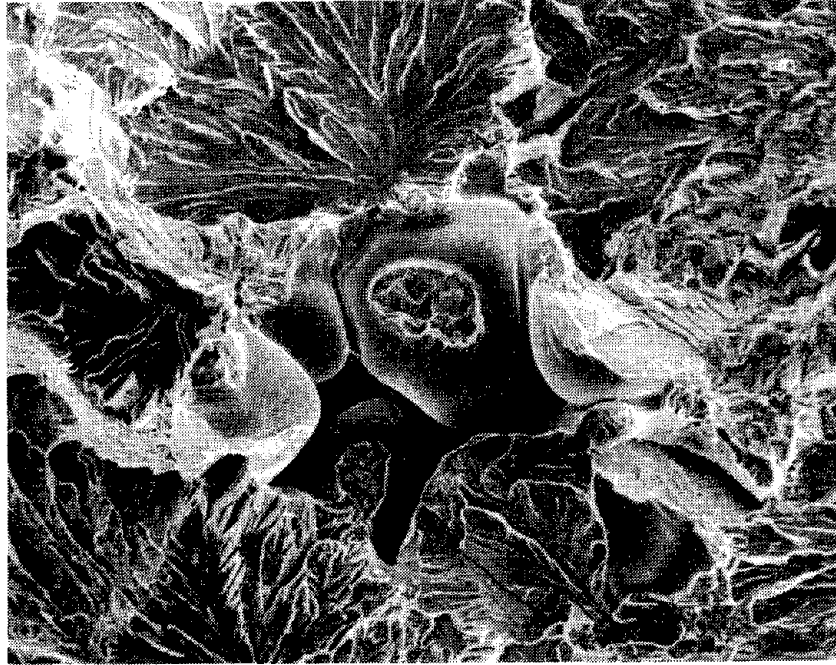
TENSILE FRACTURE OF THE ALLOY WELD METAL OF WELD 10
